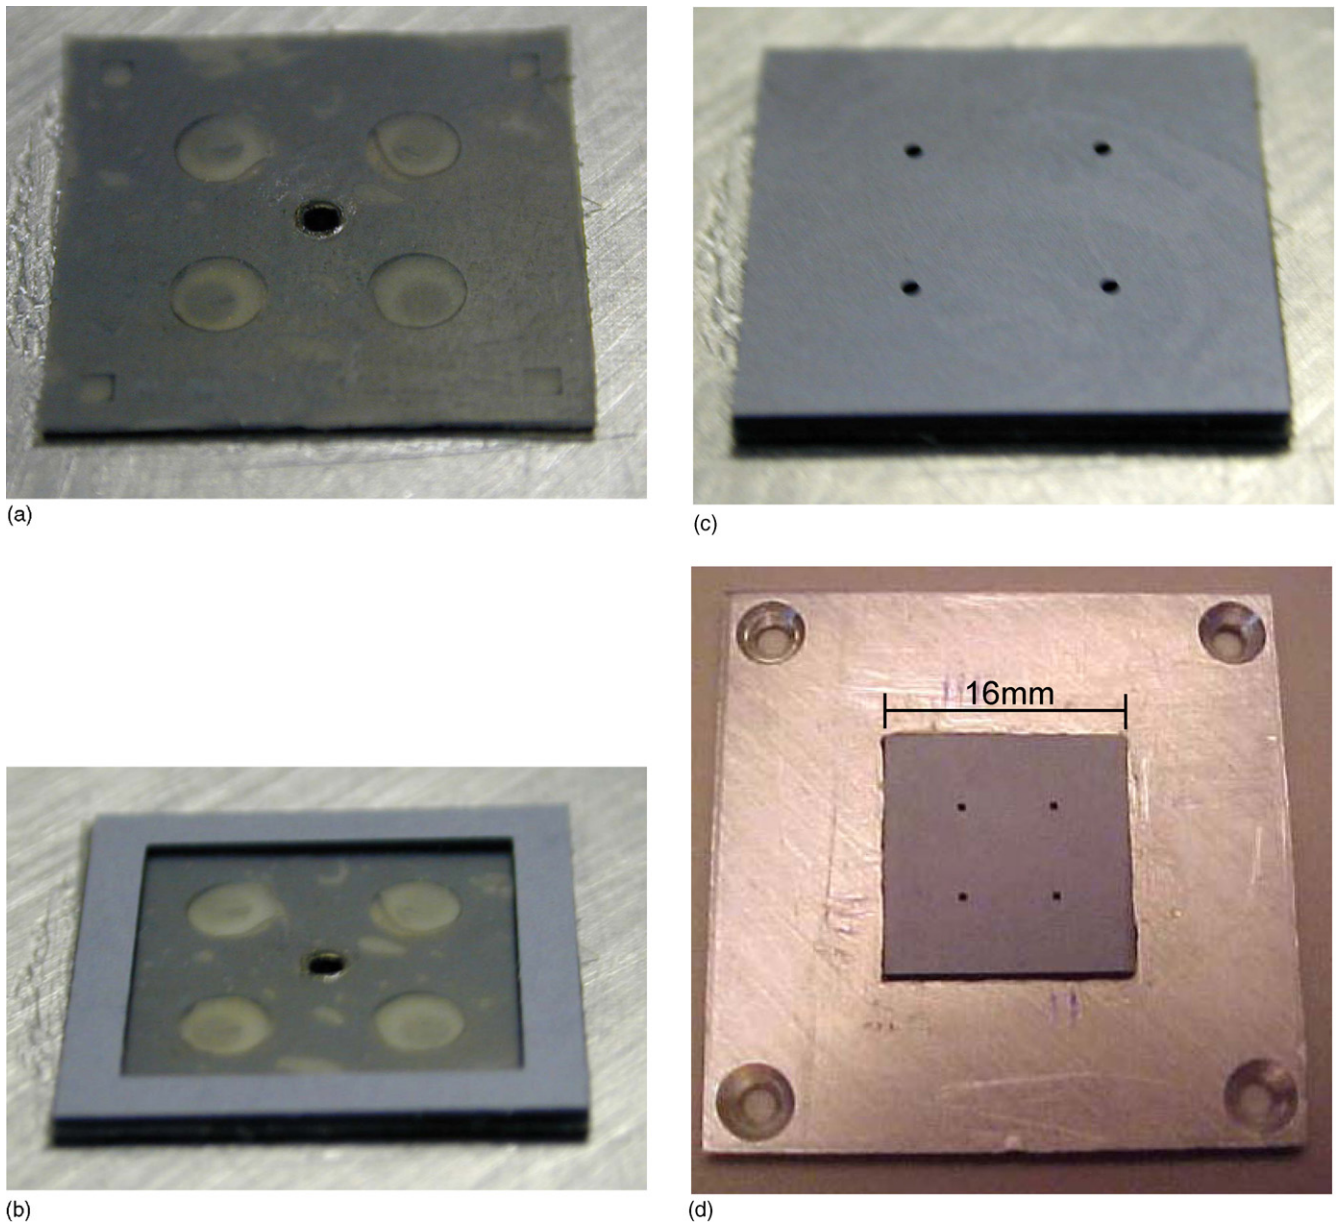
Photographs of pneumatic microjet modulator array during assembly. (a) Mounted actuator chip with attached membrane. (b) After addition of spacer chip. (c) After addition of orifice array chip. (d) Fully assembled pneumatic microjet modulator array mounted for testing.
